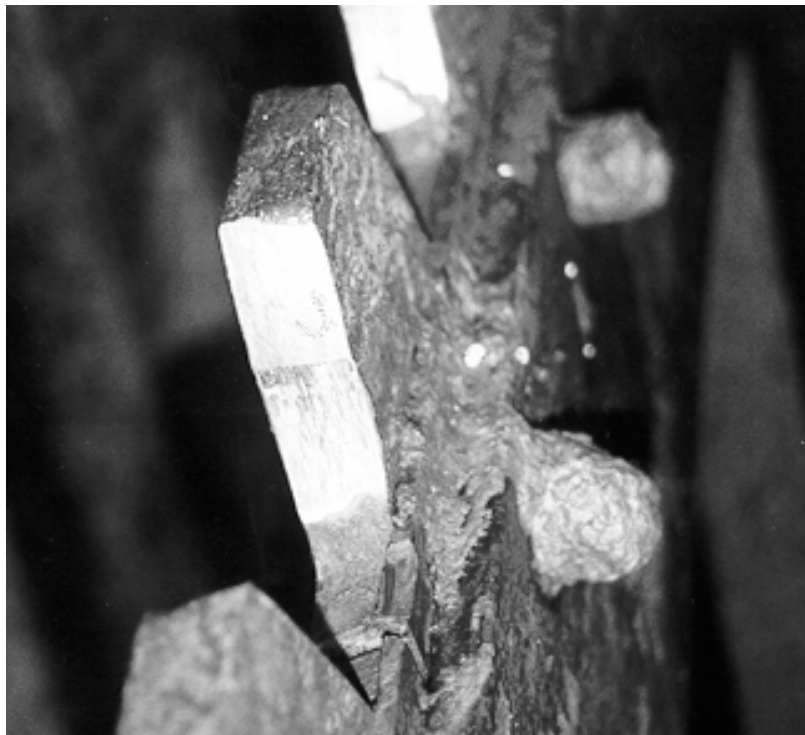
(left) Pinion and gear transmission arrangement; Larger gear wheel
